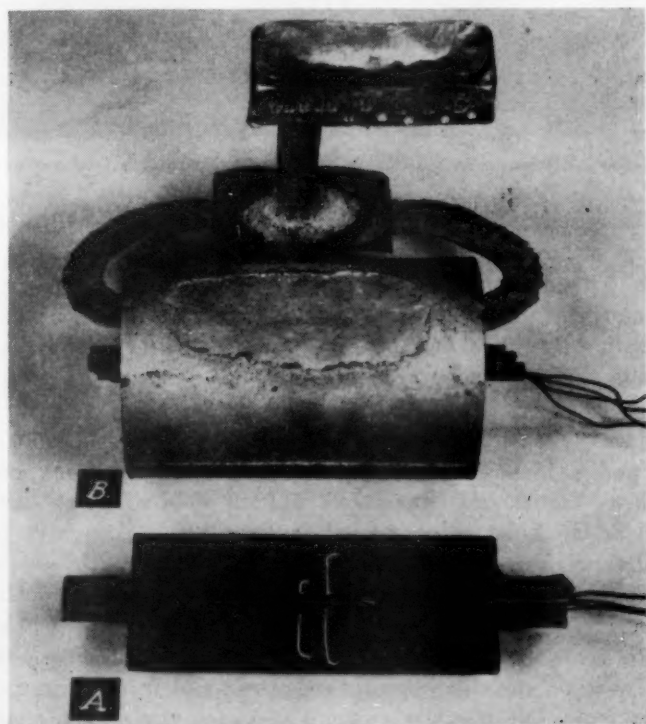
A—DRAG HALF OF A CORE SHOWING POSITION OF THERMOCOUPLES. B—TEST CASTING SHOWING LOCATION OF SPRUE AND GATES.
